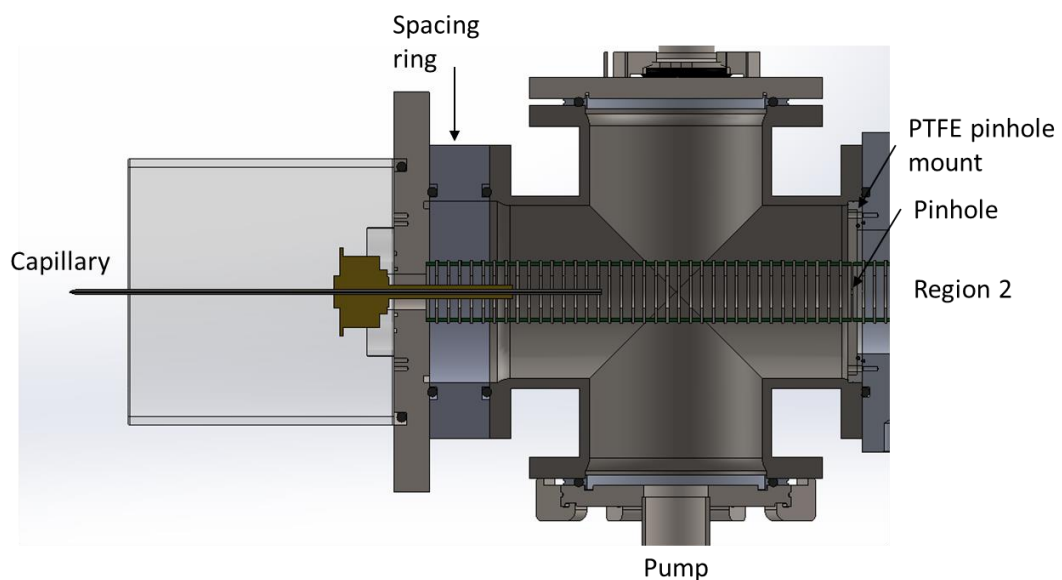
Cross-section view of R1. Parts are to scale with colour being representative of the material. Materials shown include stainless steel (4-way cross), aluminium (spacing), brass (capillary mount), Viton (O-rings) and glass fibre epoxy (PCBs). One alteration not shown, tape wrap, see text for details. Lower tube leads to the pump, with the start of R2 shown on the right. R1 is usually measured at a pressure of around 1.3 Torr.
